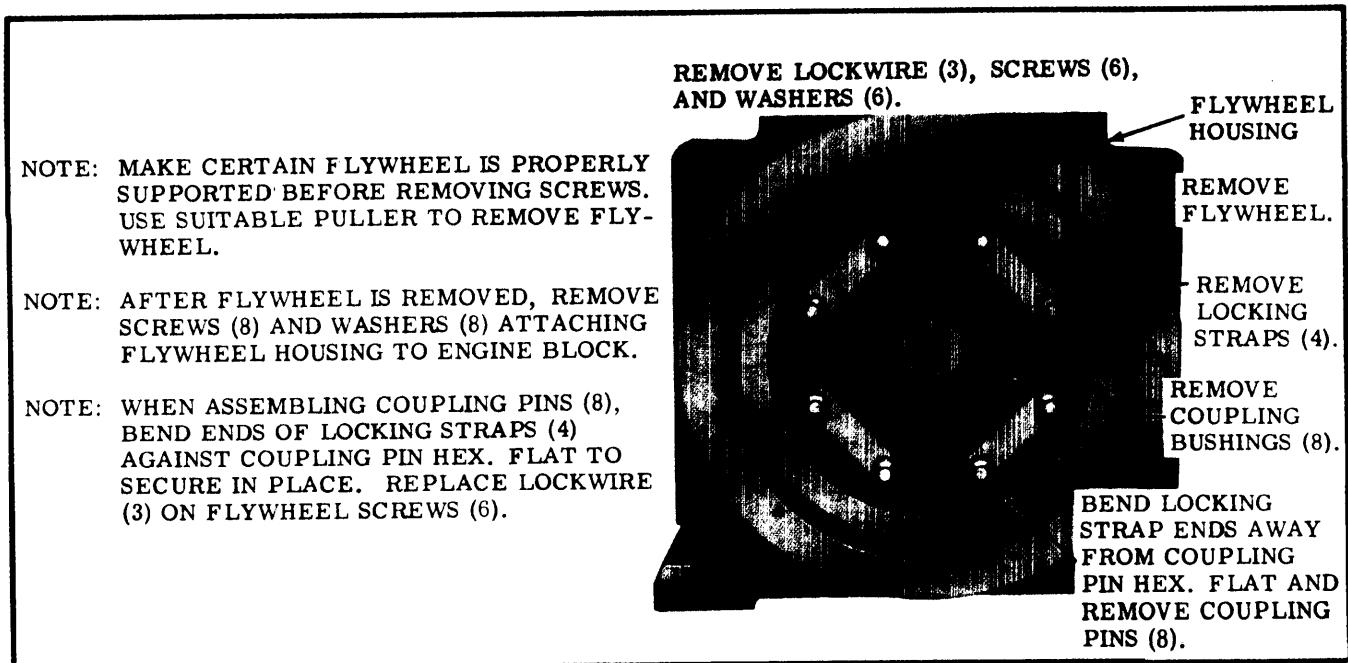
Engine Flywheel and Flywheel Housing, Removal and Installation.
